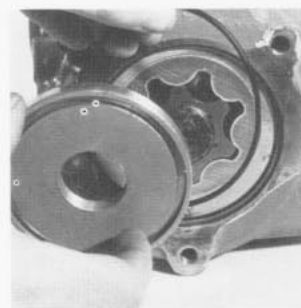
Remove Spacer Plate and O-Ring (Earlier Units)
